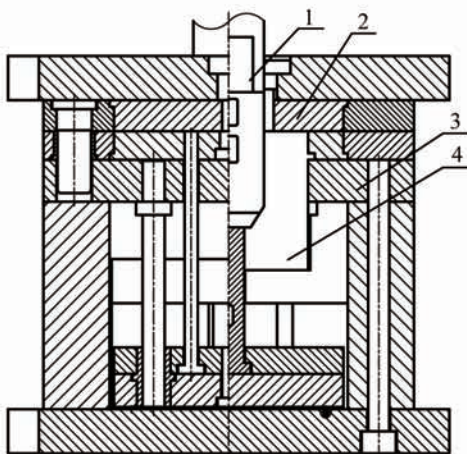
Mold of spiral sample: 1-punch; 2-upper die; 3-lower die; 4-chamber
